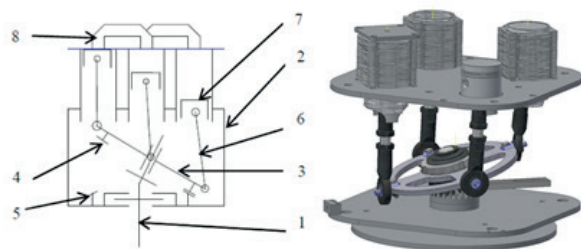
Mechanism FIK: 1 - shaft, 2 - crankcase, 3 - swinging plate, 4 - bevel wheel (part of swinging plate), 5 - bevel wheel (part of crankcase), 6 - ball joint segment, 7 - piston, 8 - head cylinder and regenerator pipe
